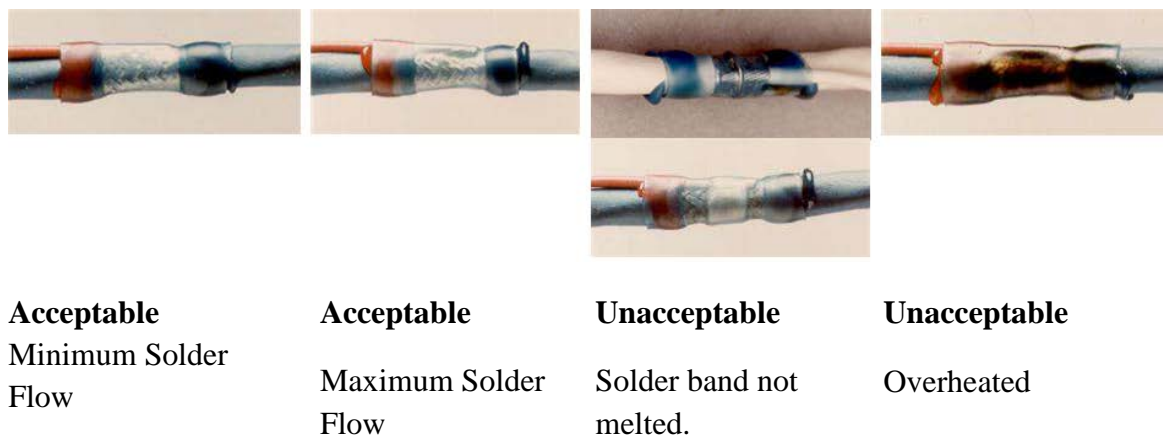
Examples of high temperature solder sleeves that have acceptable and unacceptable solder flow.
